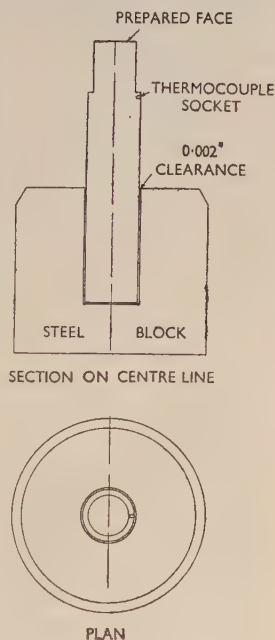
Lower Specimen and Holder for Pressure Welding.  $\frac{1}{2}$  natural size.
